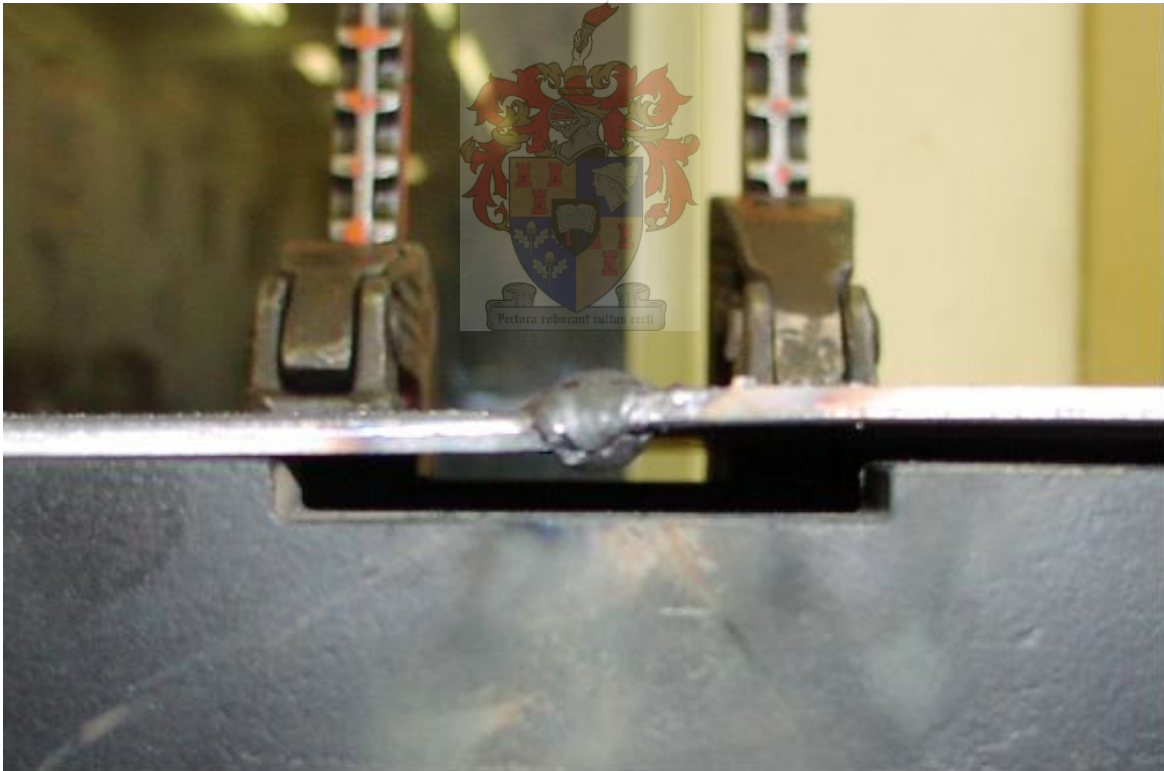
Excessive distortion of welded plates due to misalignment.
